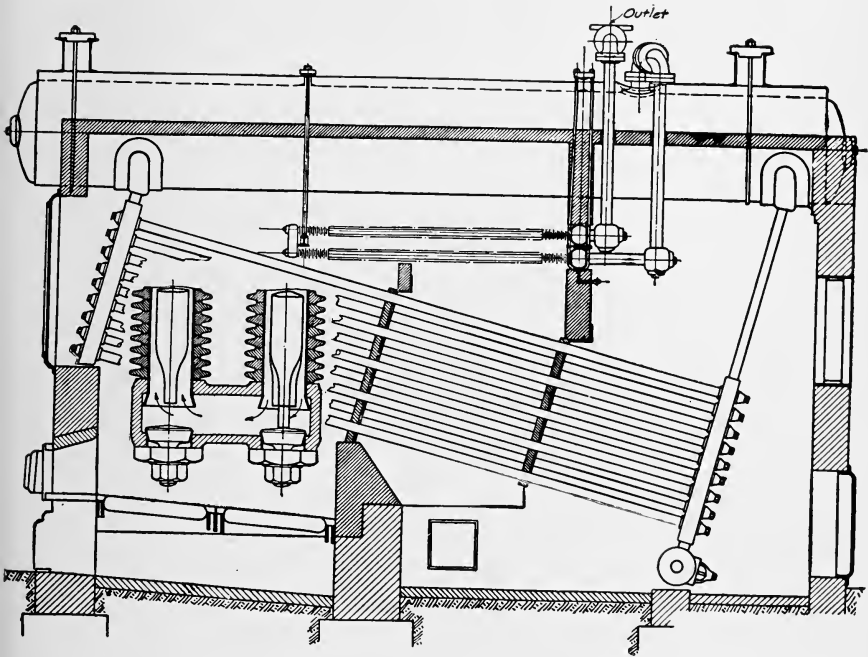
Foster Superheater in Babcock and Wilcox Boiler.
